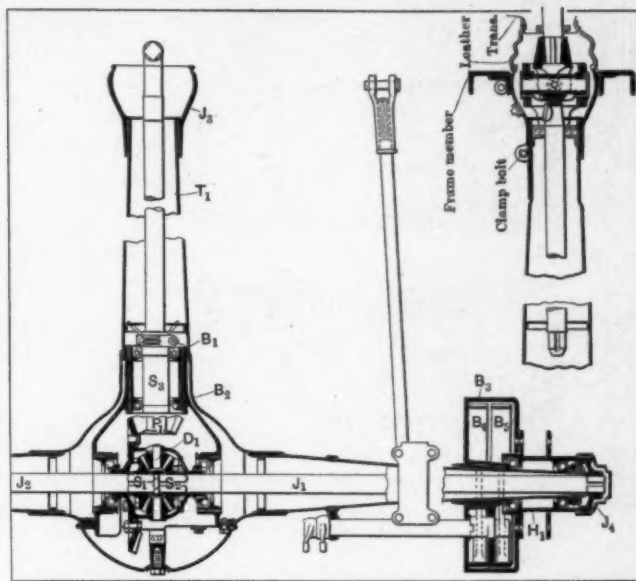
Pressed-steel type of live rear axle, section to show bevel differential and two pairs of internal expanding brakes
